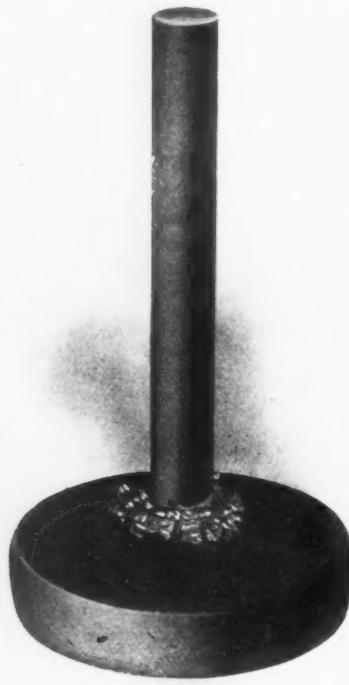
Stem of Carbon Steel Welded to a Soft Steel Disk.
